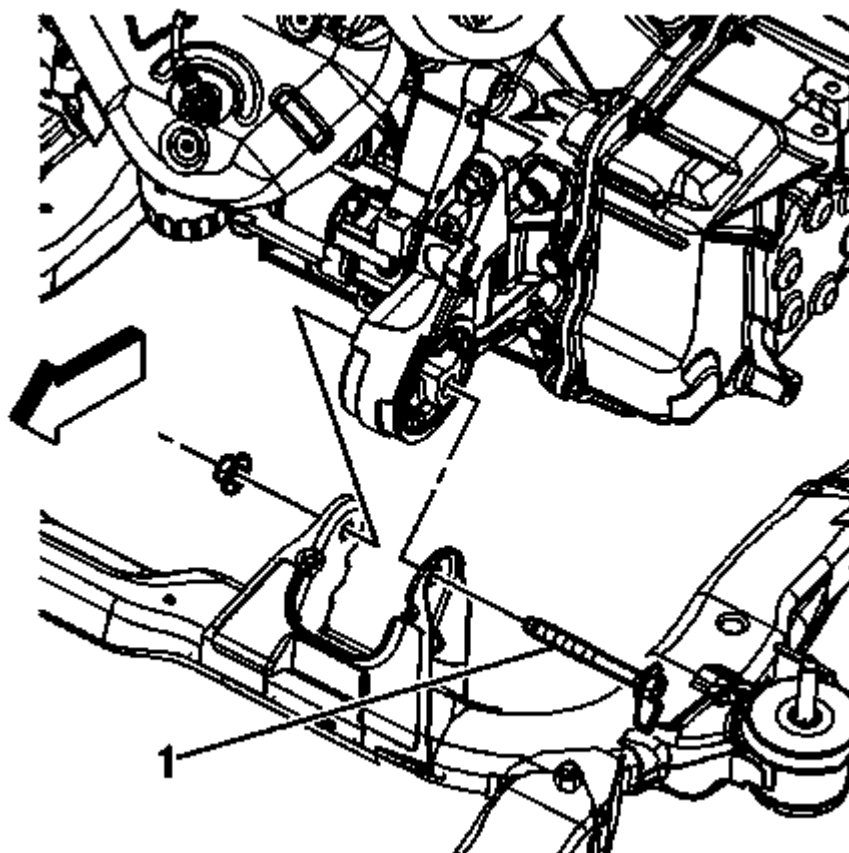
Identifying Front Transaxle Mount & Through Bolt
